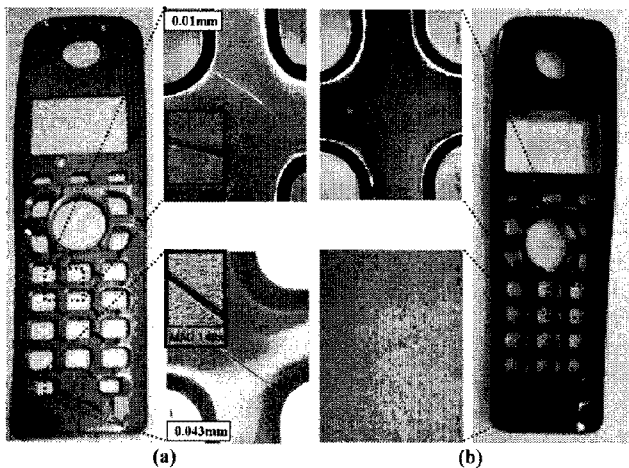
Comparison of weld-lines (a) Conventional injection molding (b) Rapid Heat & Cool Mold
